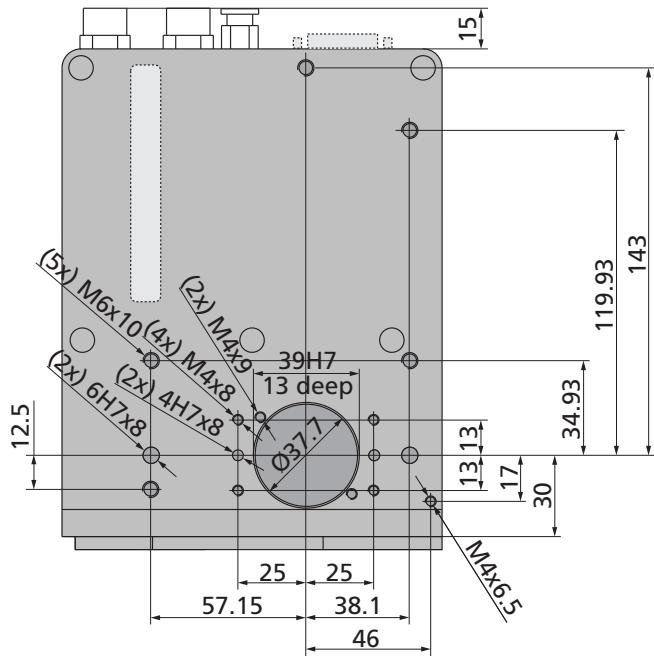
on page 22 shows the scan head with its outer dimensions and the parts which are important for mounting. The scan head installation is described in chapter "Mounting the Scan Head", on page 26.
